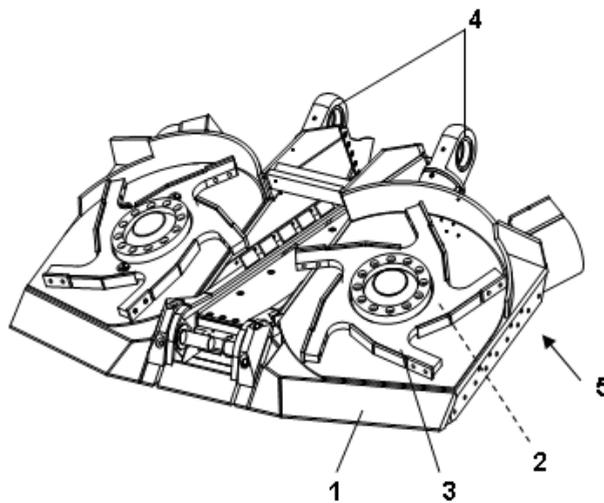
Loading table of MH-620 Sandvik roadheader (Młynarczyk and Ziętkowski, 2010); 1 – loading table; 2 – loading gear; 3 – loading stars/scrapers; 4 – hydraulic cylinder; 5 – expansion system of loading table
